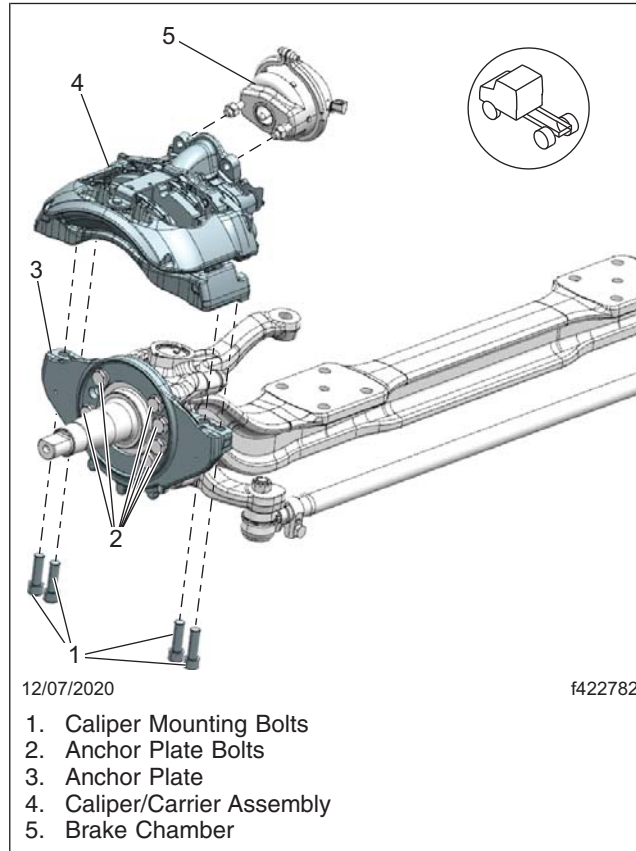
, Brake Calipers Mounted on Old Anchor Plates
